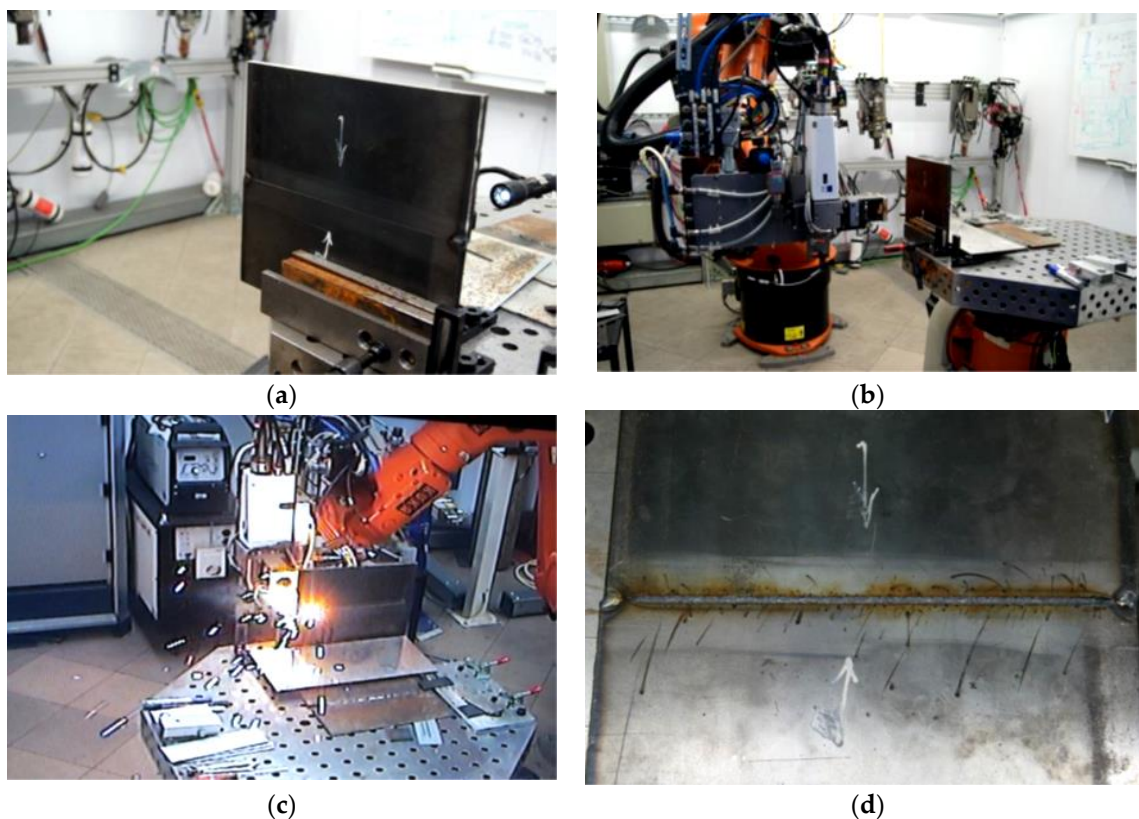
Laser welding of the joint in the PC position with 5 kJ/cm linear energy: (a) tacked plates fixed vertically, (b) determination of the weld axis, (c) course of the welding process, and (d) finished joint.
